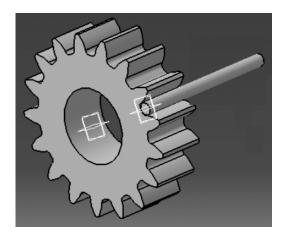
Wire electrode diameter should be smaller than gear fillet radius.
